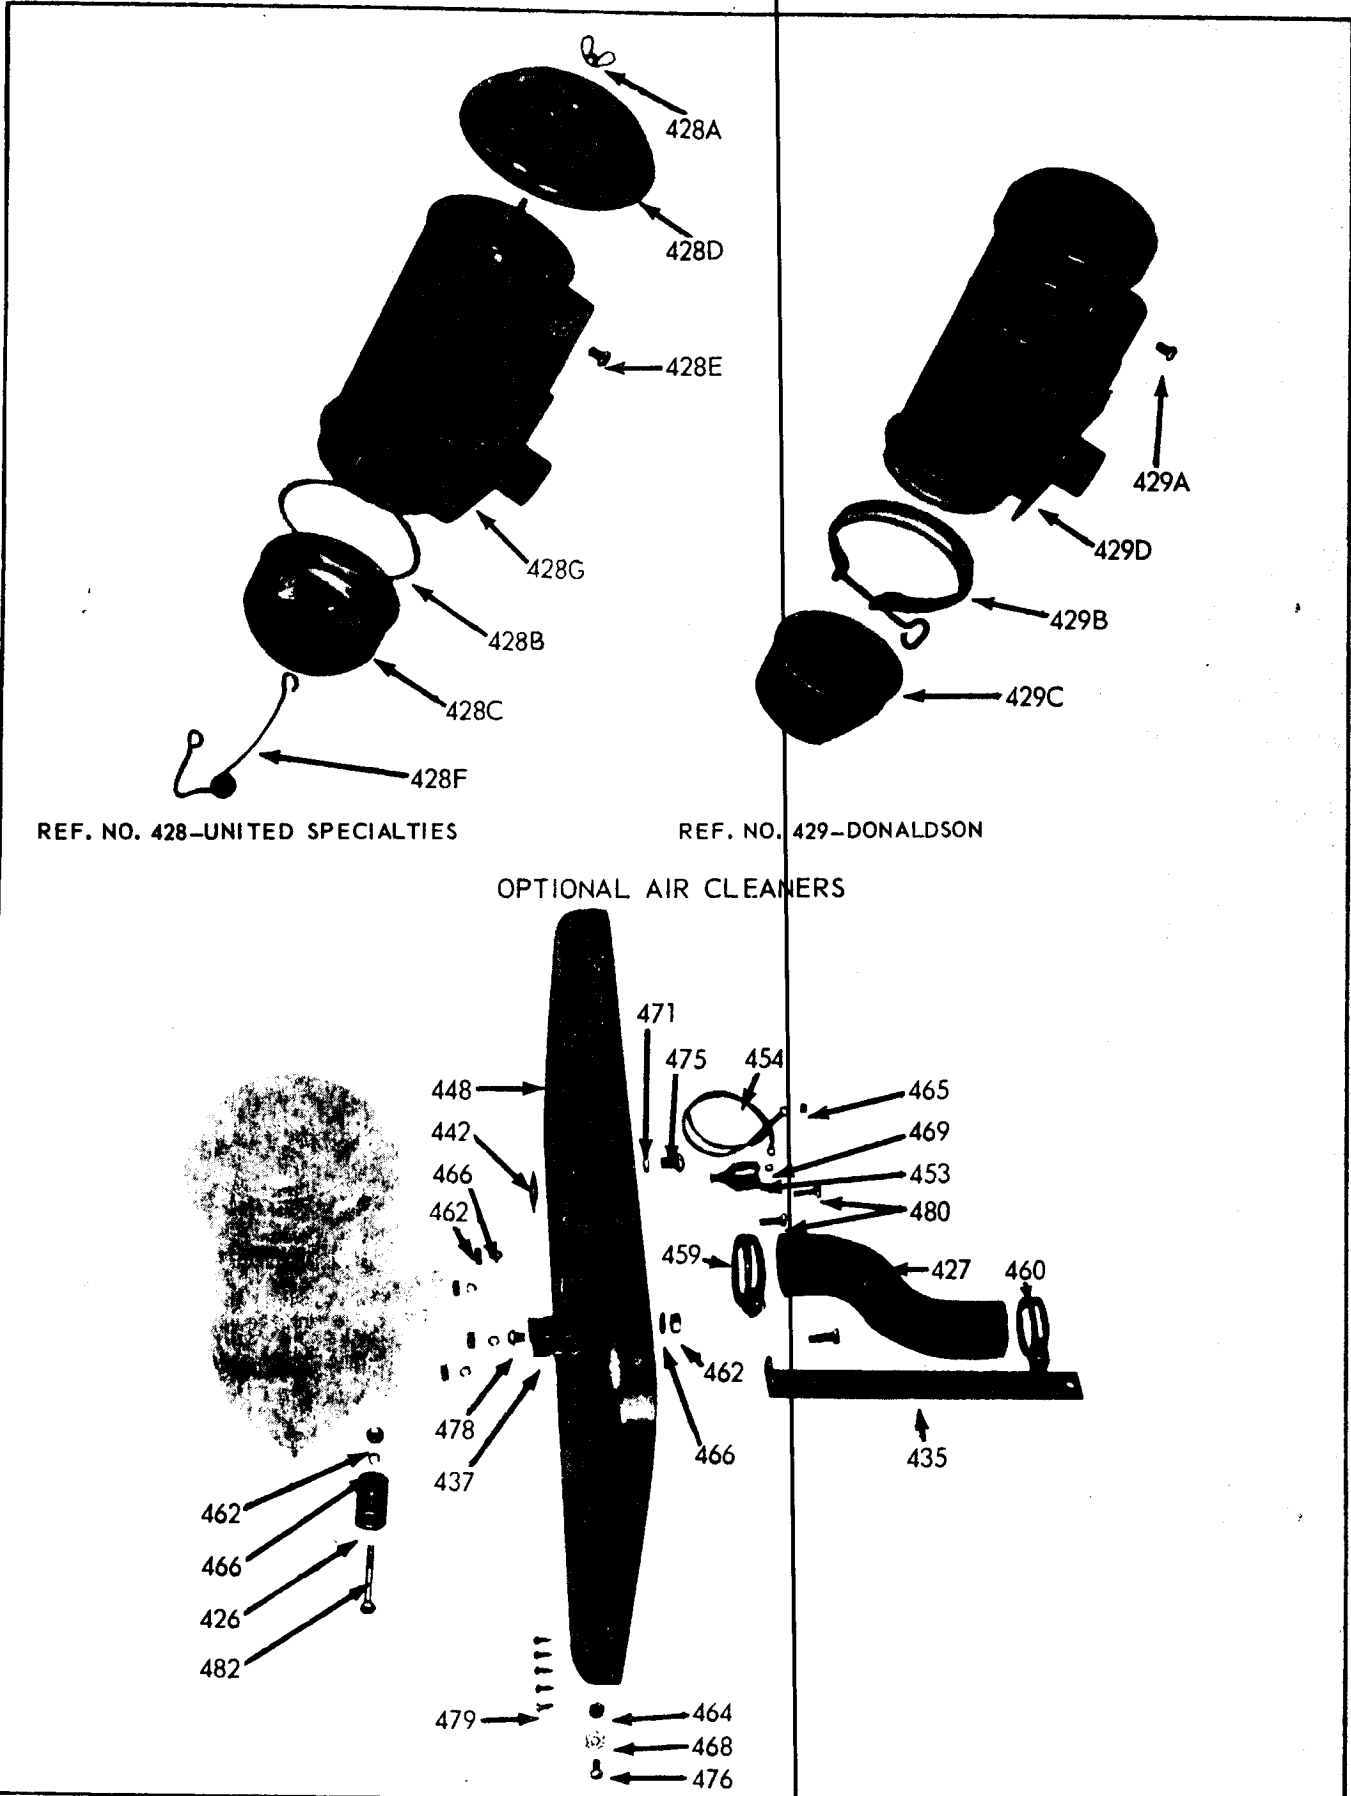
, END PANEL AND AIR CLEANER FOR ENGINE HOUSE WITH FUEL TANK AT TAKE-OFF END
